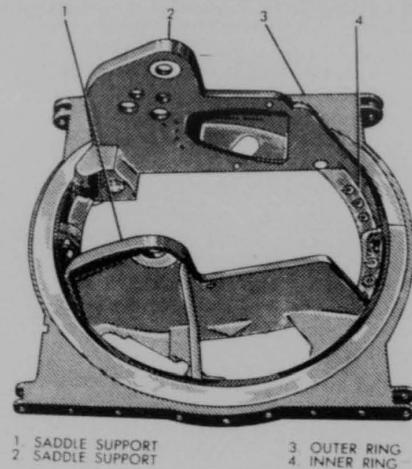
Bottom View of Inner and Outer Ring Assembly (Shown in Fixture)—Upper Turrets.
